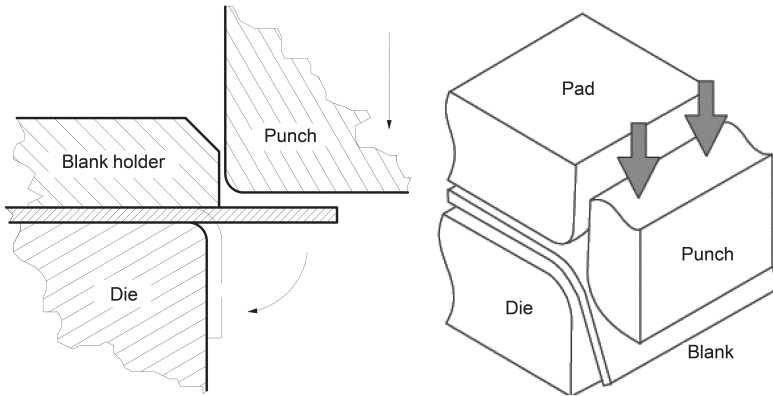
Schematics of straight flanging (wipe die) bending
